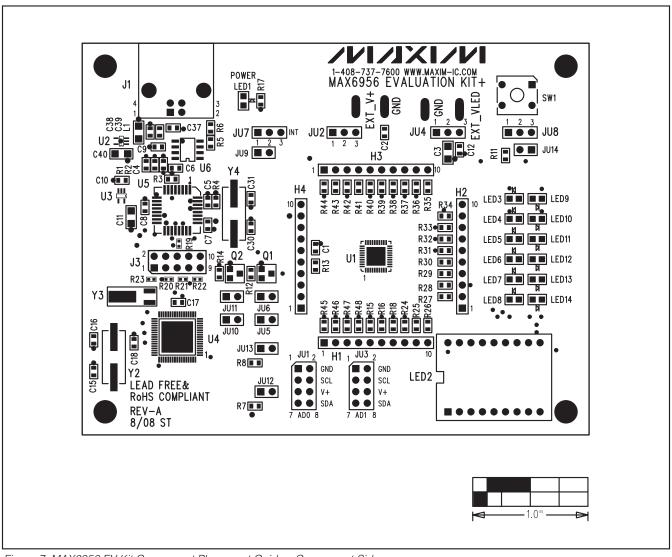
MAX6956 EV Kit Component Placement Guide—Component Side
